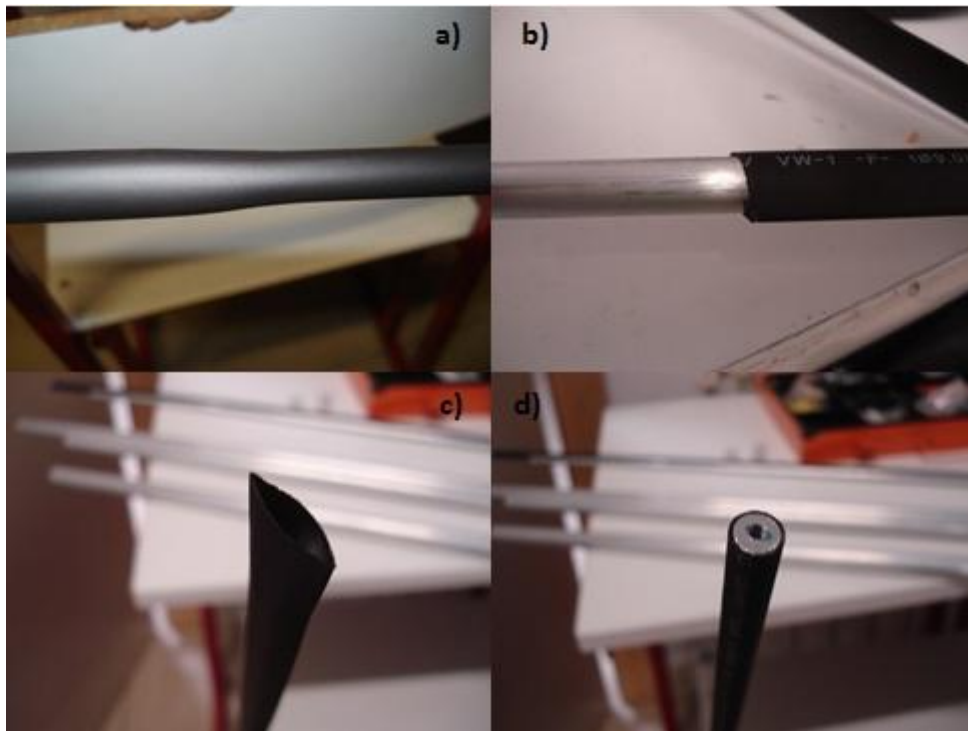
Heat retracting sleeve over solid aluminium rod; a) heat applied to sleeve; b) sleeve inserted over rod; c) sleeve inserted over rod top view; d) sleeve inserted over rod after applying heat source to retract the sleeve.
